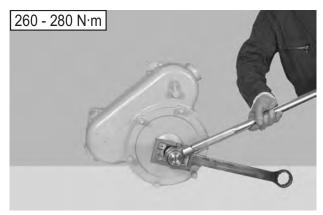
Tighten the nut using a torque wrench setting of 260 - 280 N·m.
